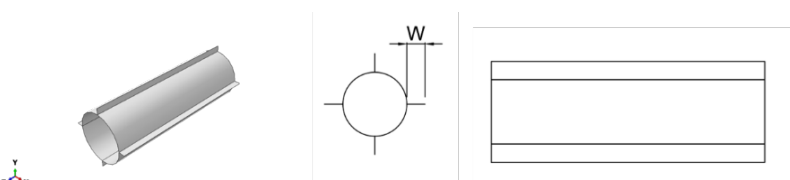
Geometrical cylindrical shell: (b) stringer-stiffened cylinder shell
